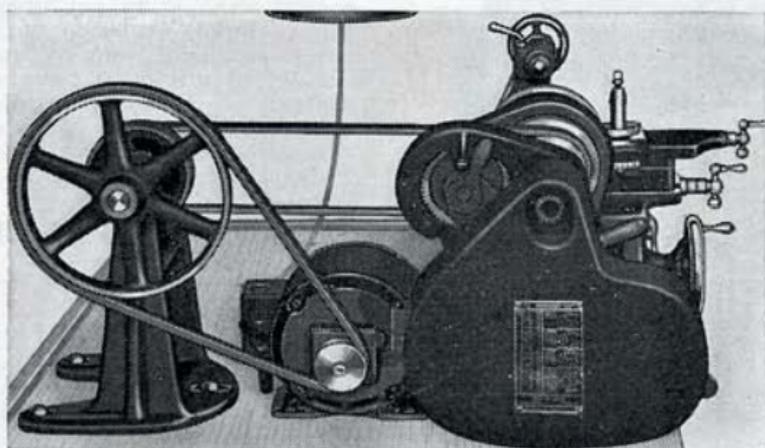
Lathe with Plain Type Horizontal Countershaft.
